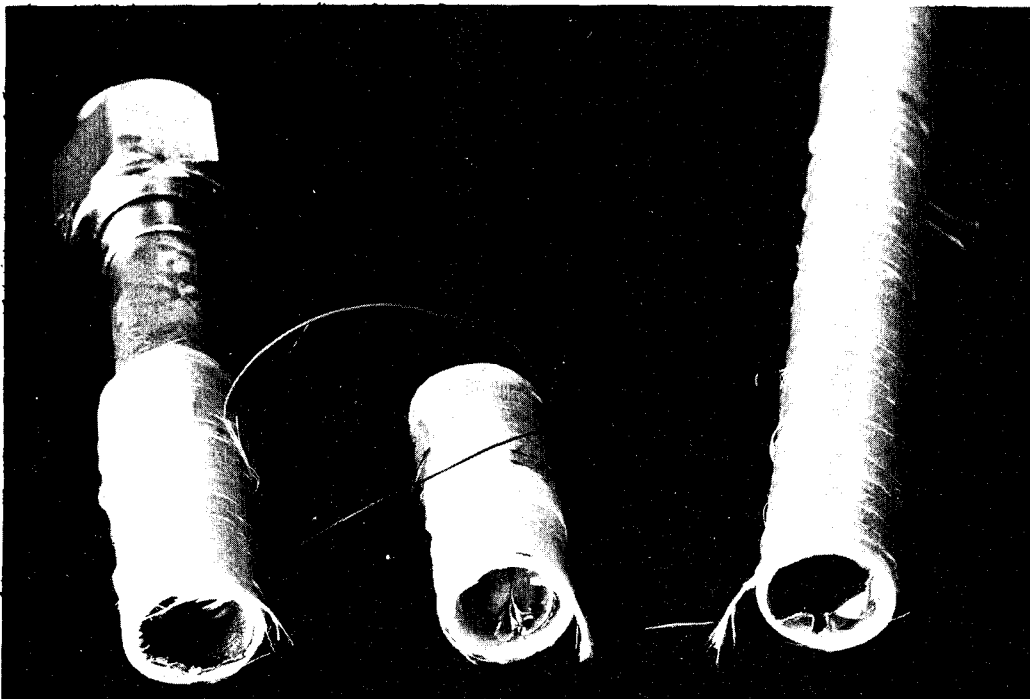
Torsion Failure Mode, 1/2 in. (1.27 cm) Diameter Tube
